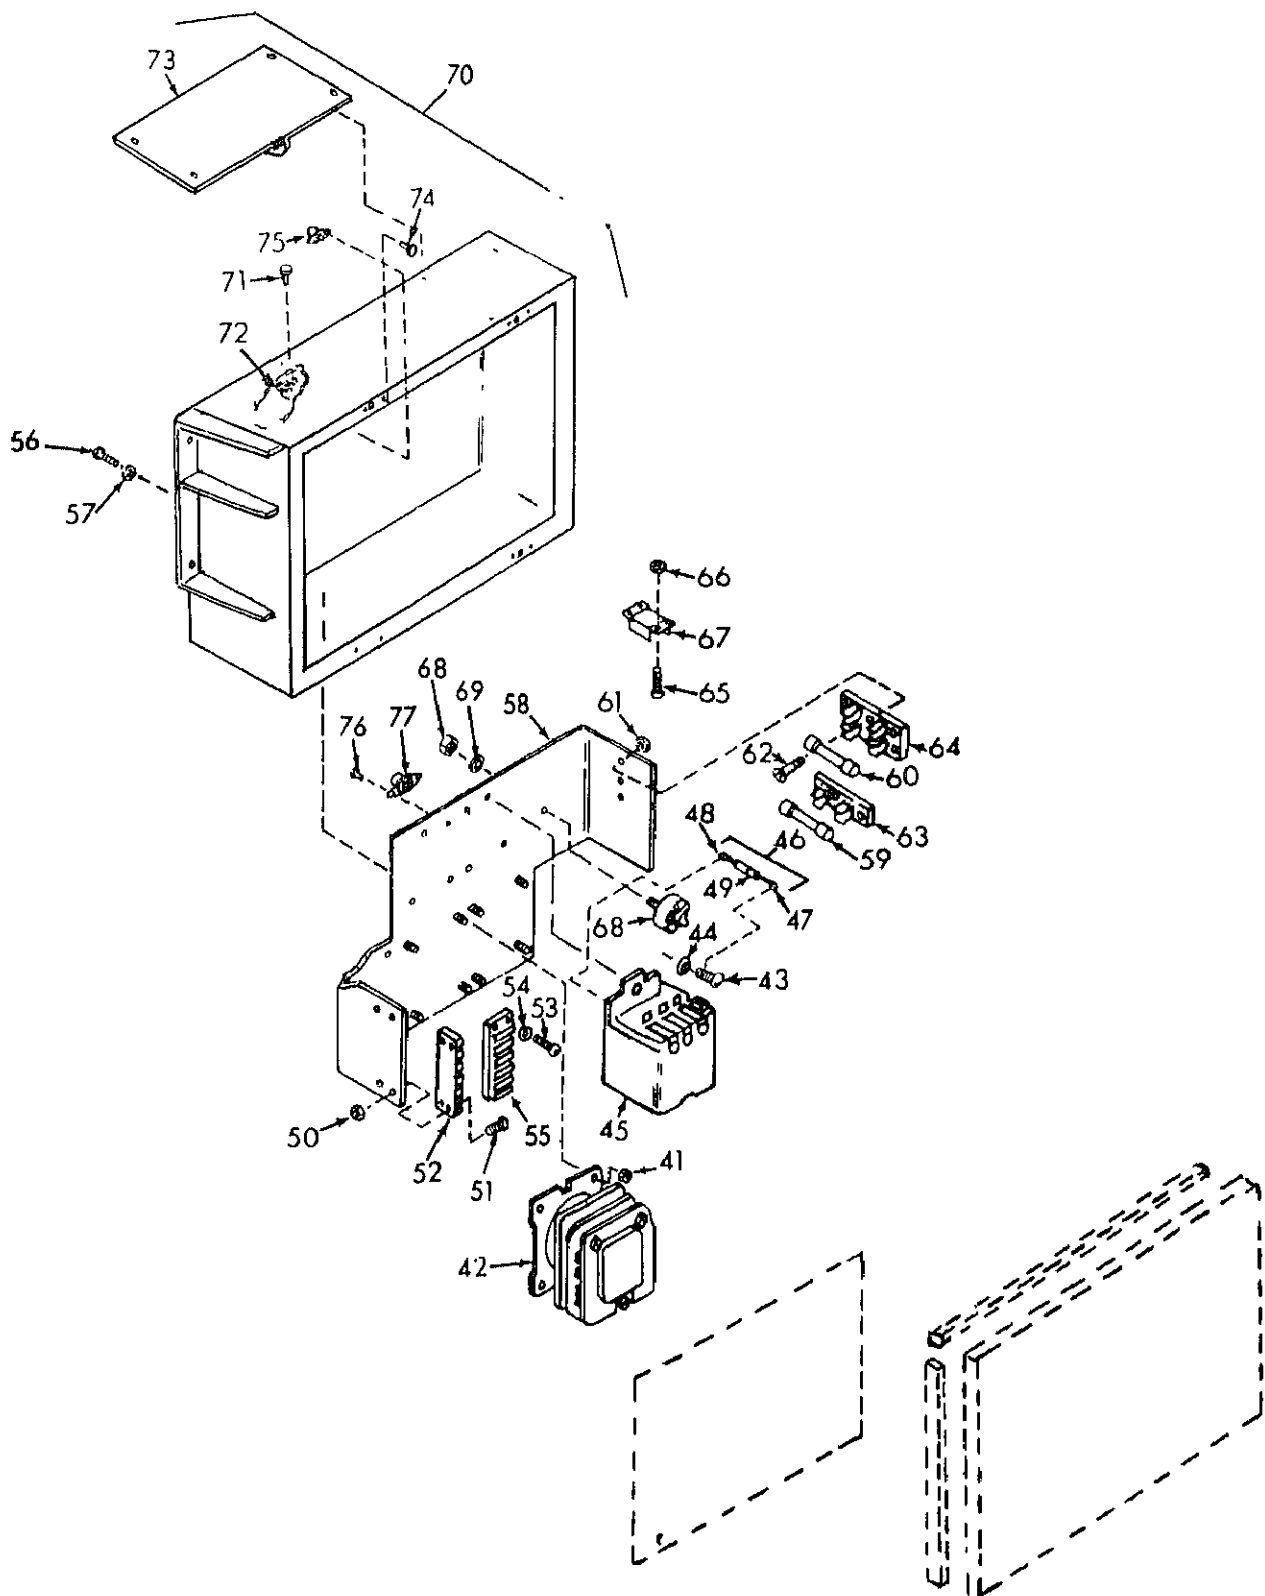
Junction Box Assembly (Sheet 2 of 3)
